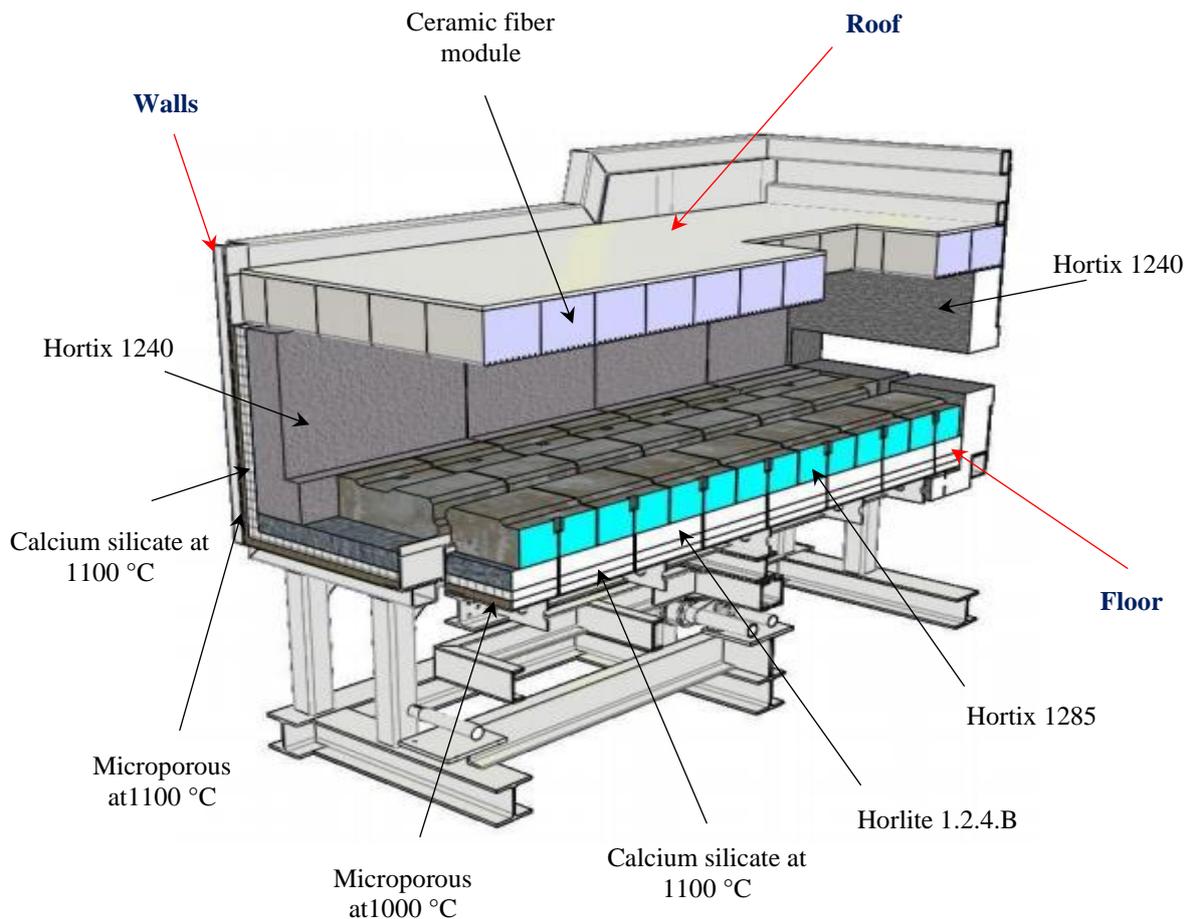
Cutting section to show the materials in the roof, walls and floor layers of the reheating furnace.
